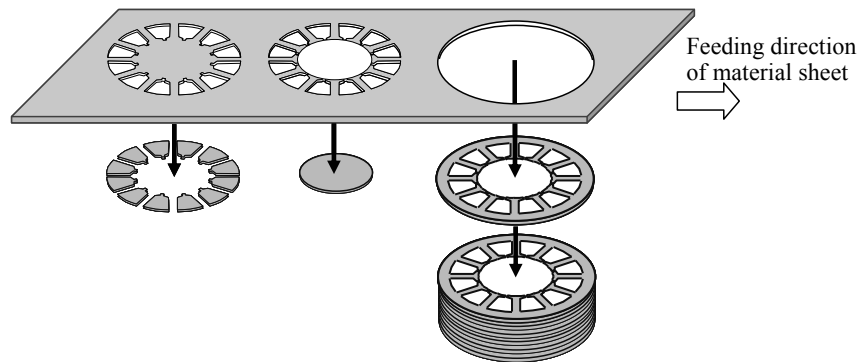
Schematic view of motor core (stator) punching using progressive die.
